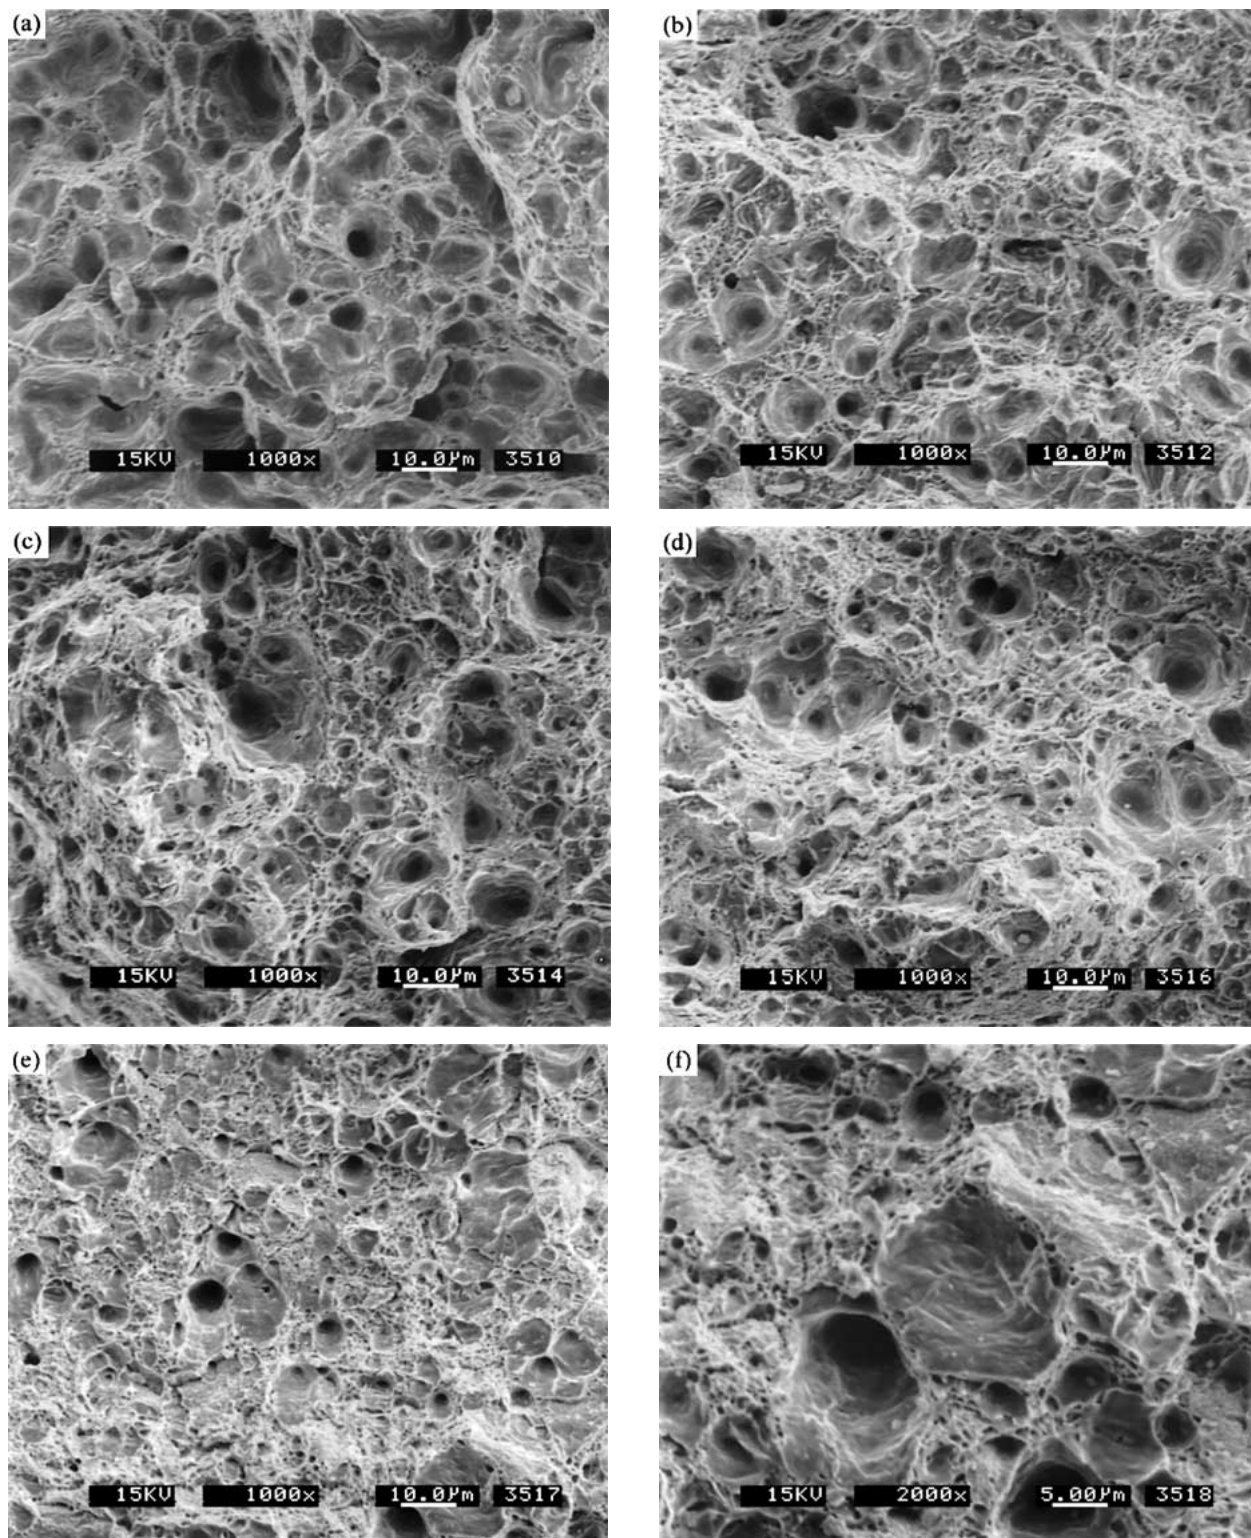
Fracture surface morphologies of PIM 17-4 PH tensile bars. (a) 450°C-debonded, 1330°C-sintered, center; (b) 450°C-debonded, 1380°C-sintered, center; (c) 600°C-debonded, 1330°C-sintered, center; (d) 600°C-debonded, 1380°C-sintered, center; (e) 600°C-debonded, 1380°C-sintered, near surface; (f) high magnification of (e).
